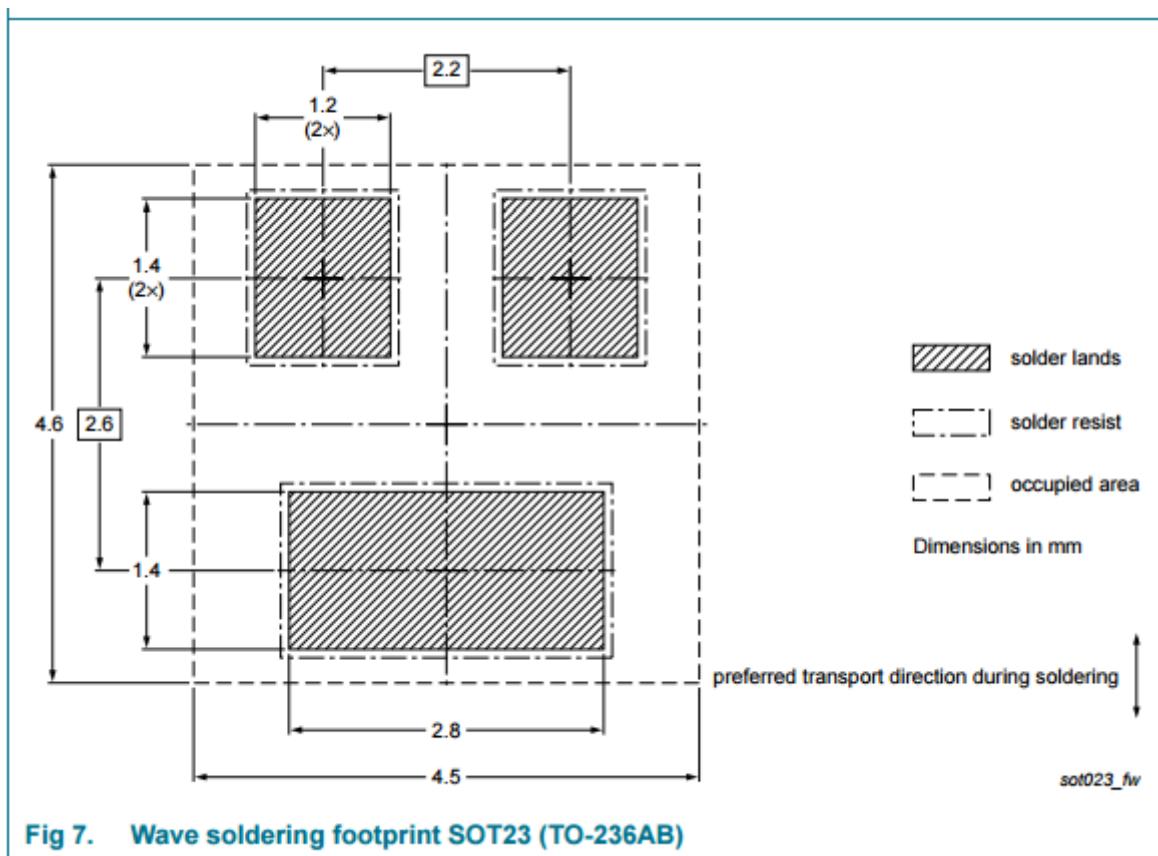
Wave soldering footprint SOT23 (TO-236AB)
